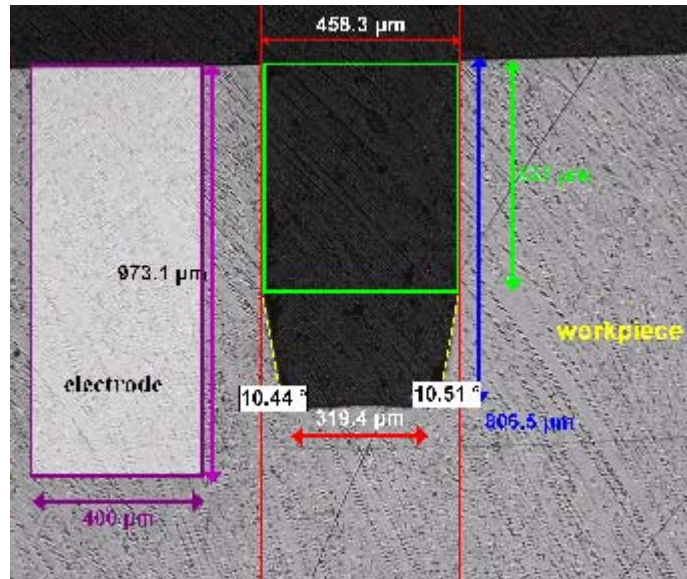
A sample of geometrical shape analysis for 24min-machined hole.
